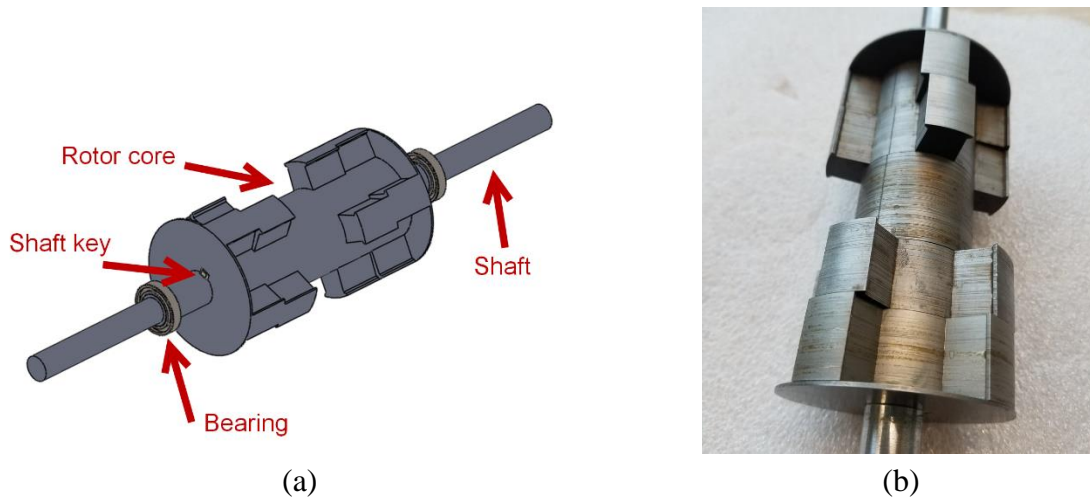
Rotor assembly of the SLTW 6/4 FSPM machine (a) CAD drawing and (b) Rotor photo.
